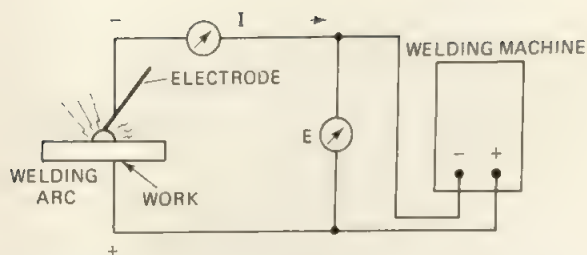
Welding electrical circuit (straight polarity).
